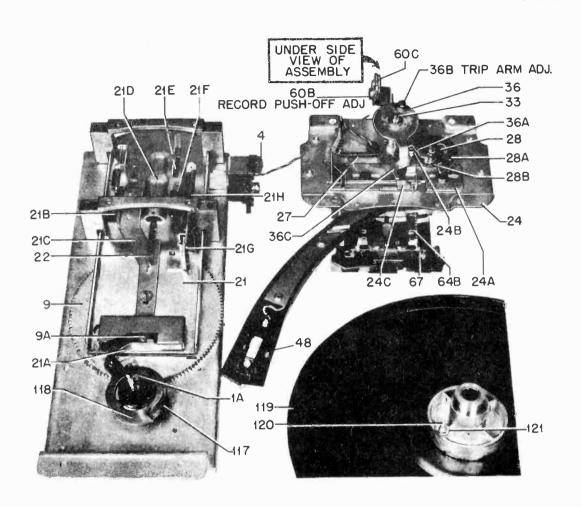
DISASSEMBLED VIEW OF RECORD CHANGER MECHANISM
